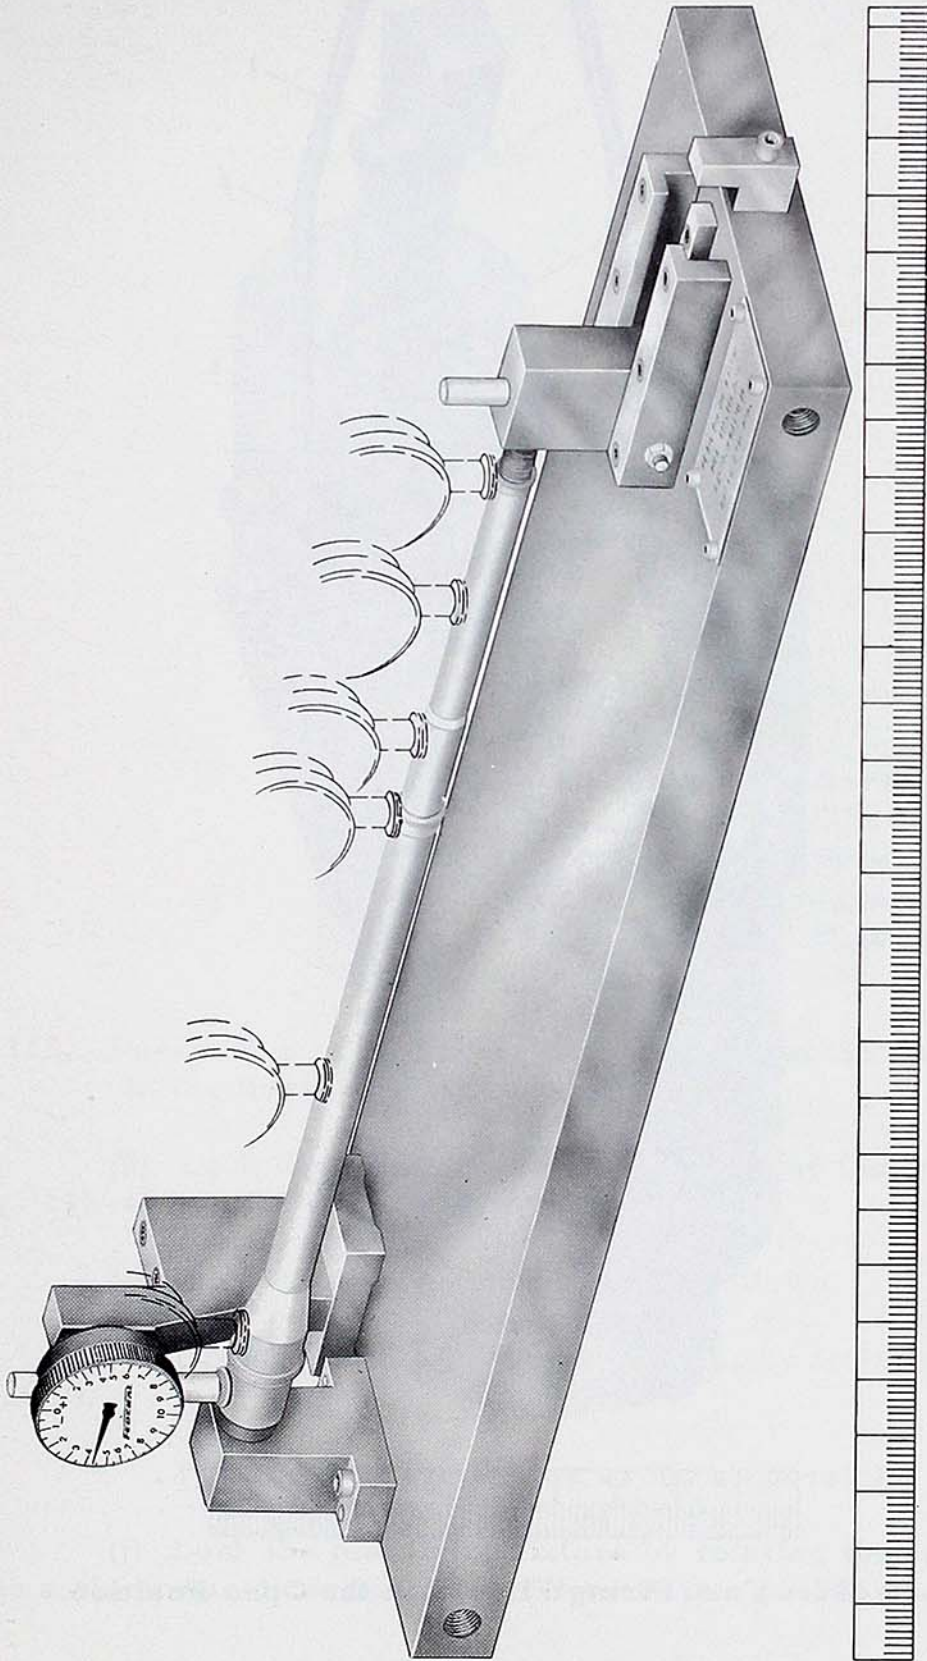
Barrel and Barrel Extension Assembly in Position on Concentricity Gage.
